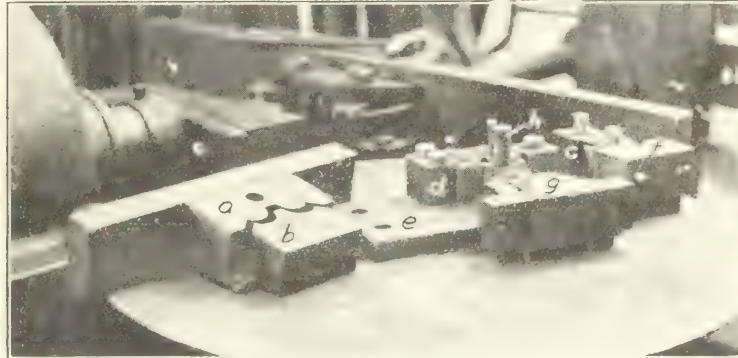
Dies for Forming Inner and Bottom Members of Superheater Tube Clips.
